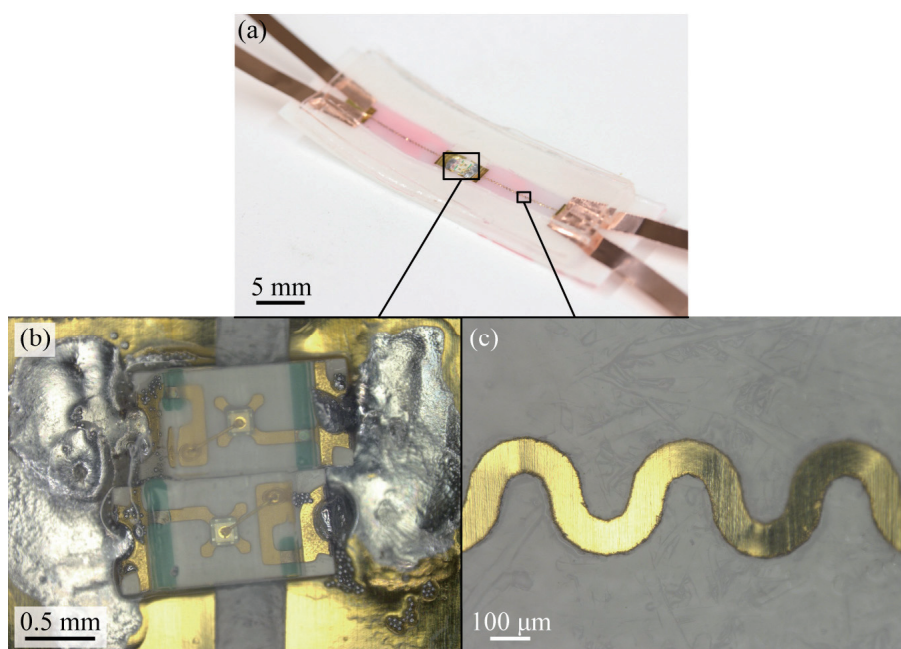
Optical images of fabricated flexible device, which is composed of self-healing gold interconnects and surface-mounted LED chips. (a) Optical image of flexible device. (b) Enlarged view of LED chips soldered on contact pads. (c) Enlarged view of wave-shaped gold interconnect on AF substrate.
